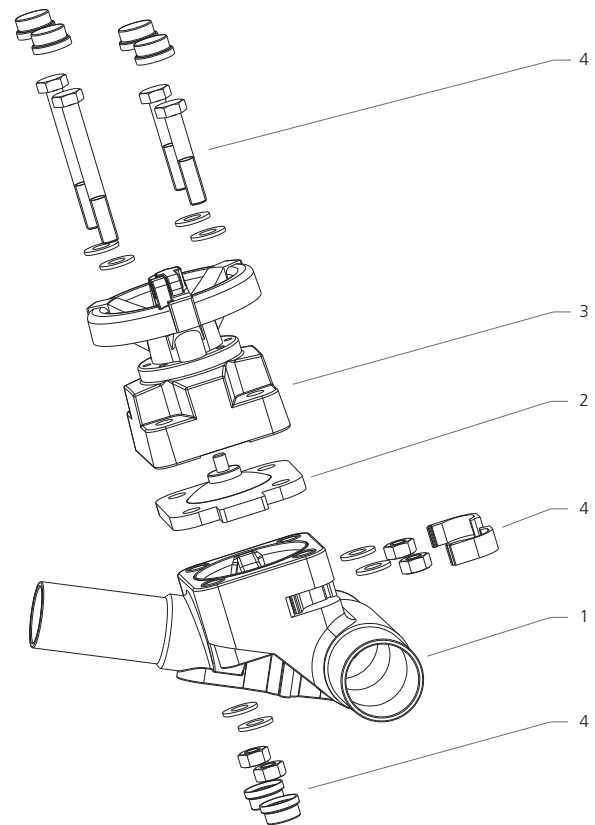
Exploded assembly drawing using the example of PVDF-UHP.
